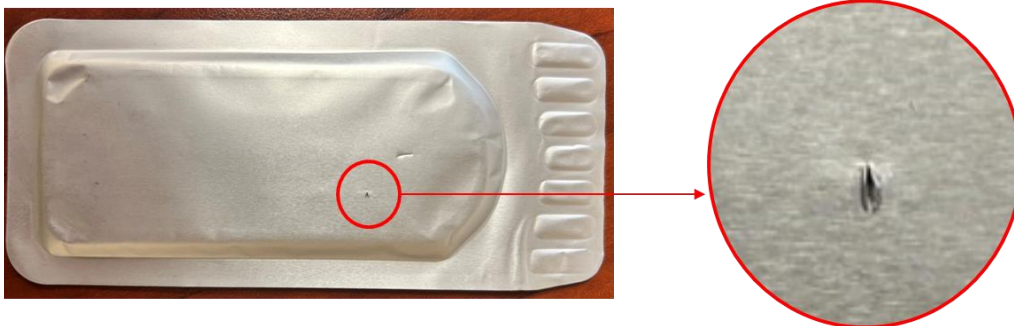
Foil suture package (bottom side) indicating hole location. Top side of suture package contains printed product information as shown in Attachment 1.
